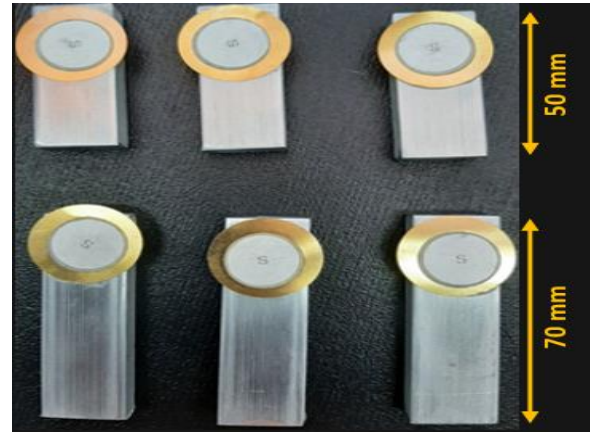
Workpieces with lengths of 50 and 70 mm.
